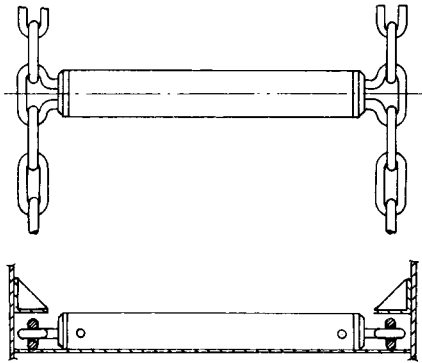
Scraper flight using parallel welded chains.
